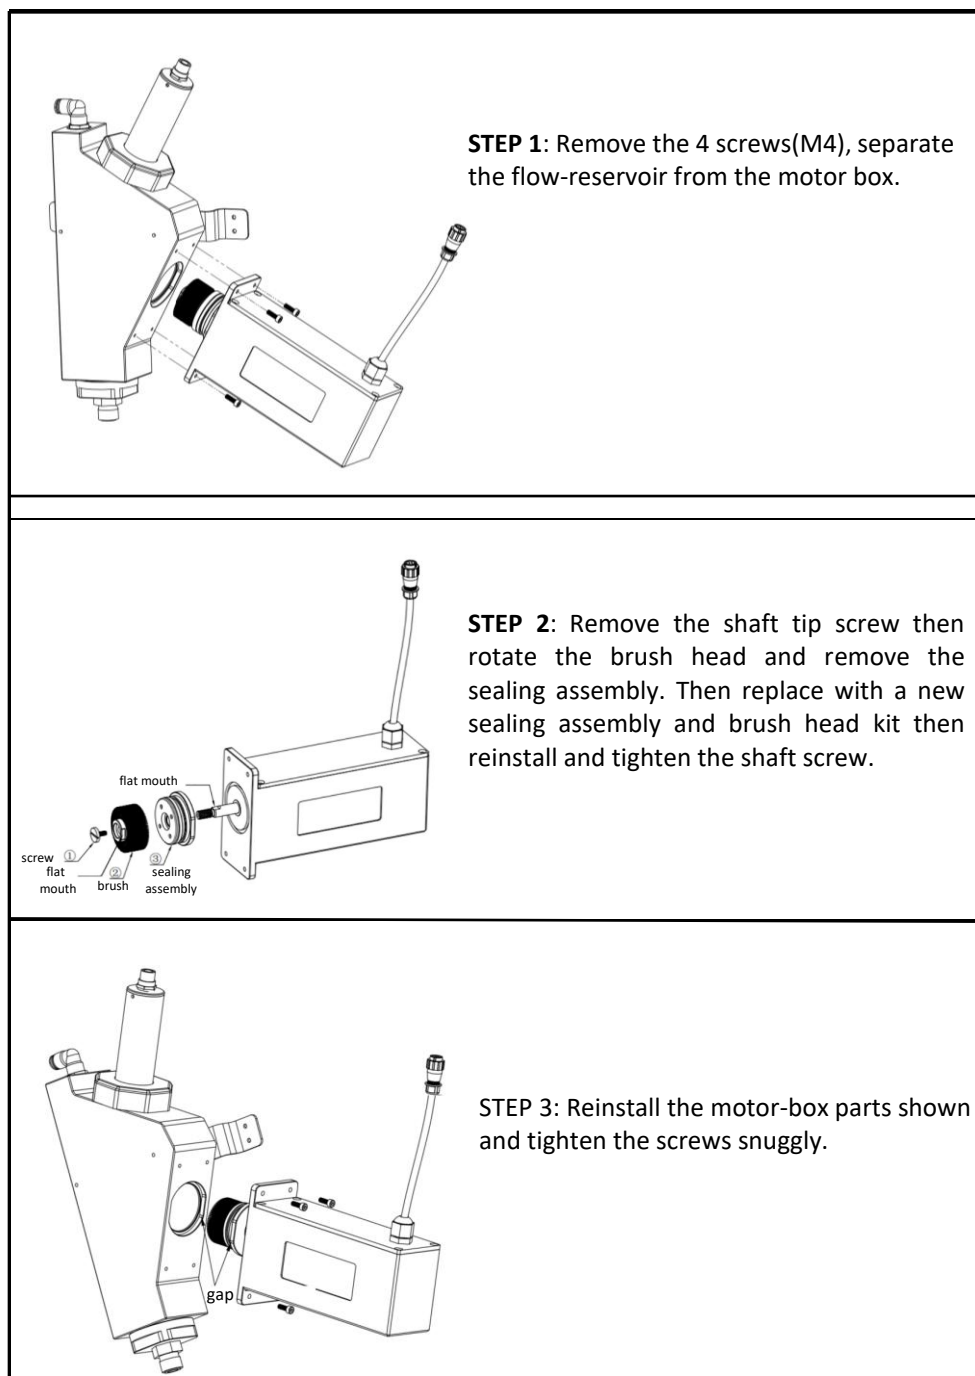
Replacing FT-100-PLUS Brush & Seal Assembly
